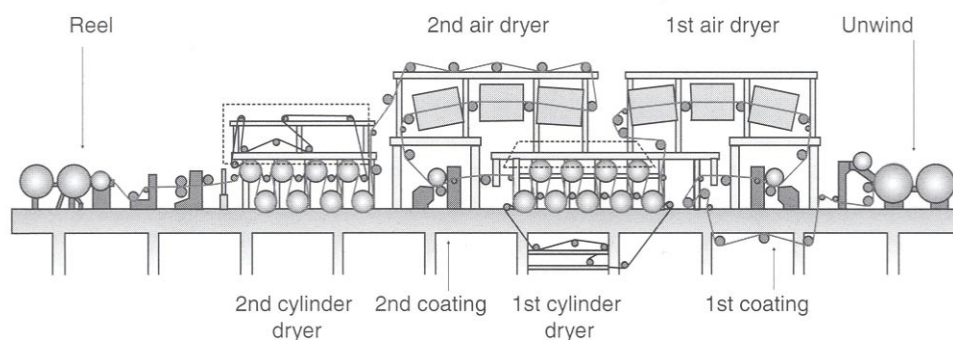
Layout of the coating machine used for coating tests (Lehtinen 2000).
